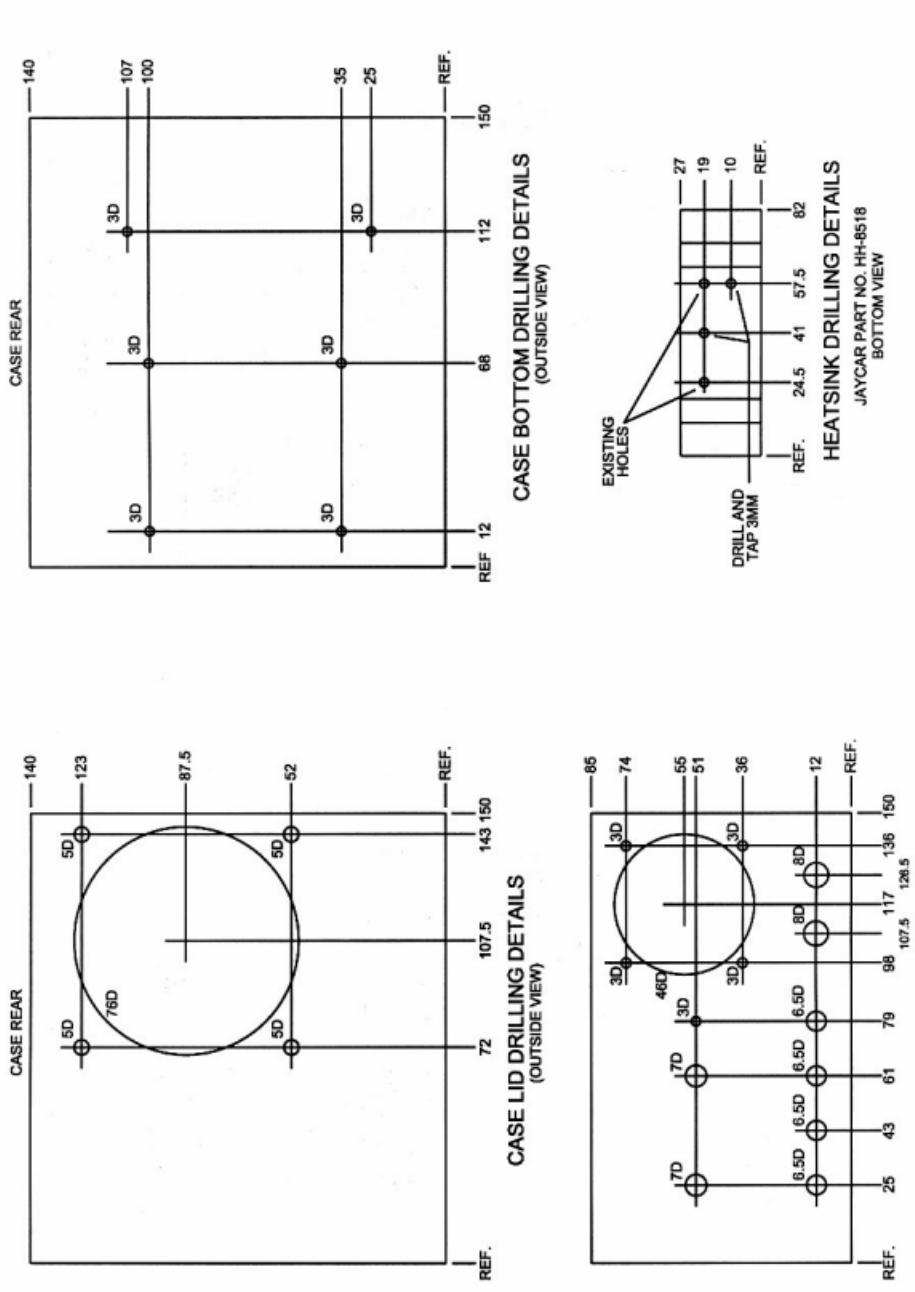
Mechanical drawings for the front panel, case and heatsink.
